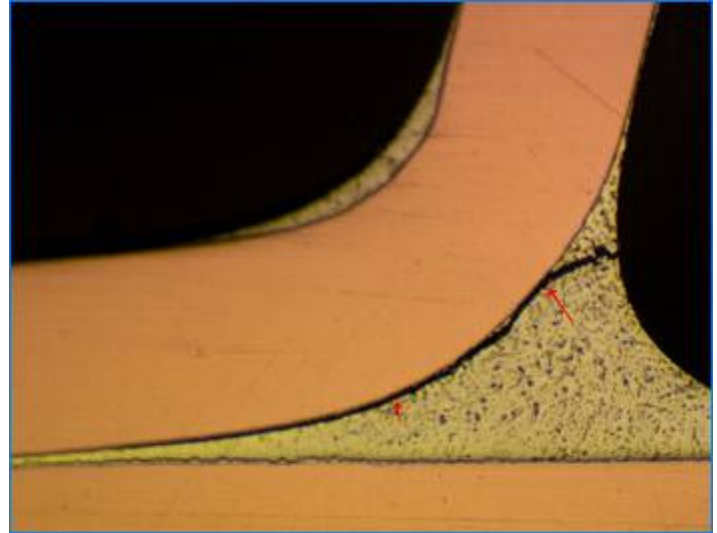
cross section, SN68, U31, left lead solder partial crack, 200xb
